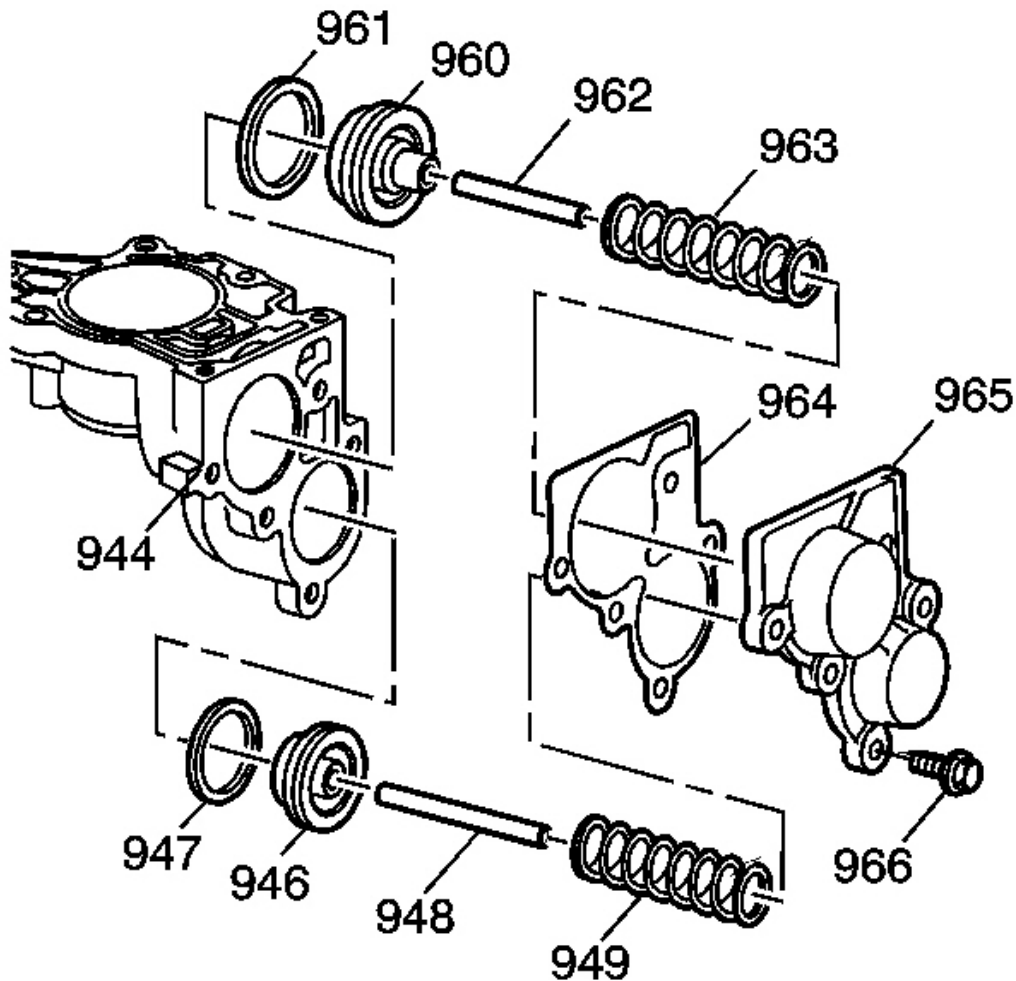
View Of Forward Accumulator Assembly & Reverse Accumulator Assembly
